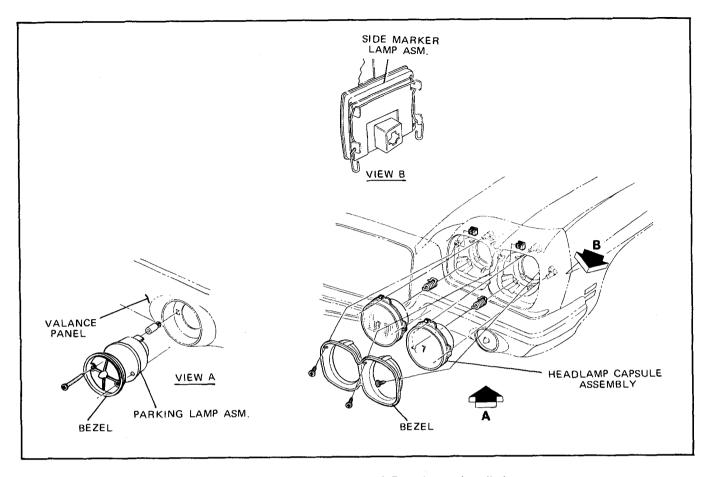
Endura Bumper and GTO Front Lamps Installation
